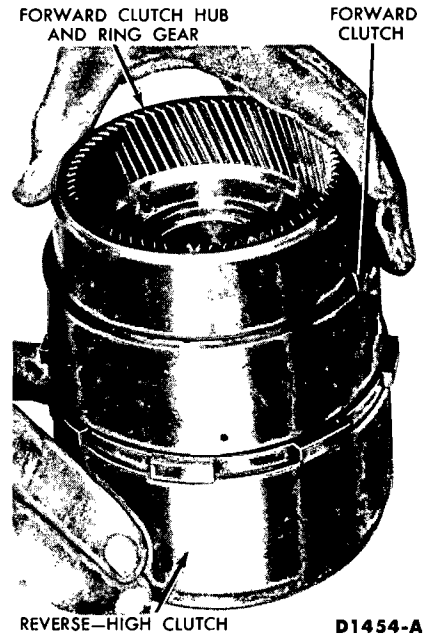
Installing Forward Clutch Hub and Ring Gear
